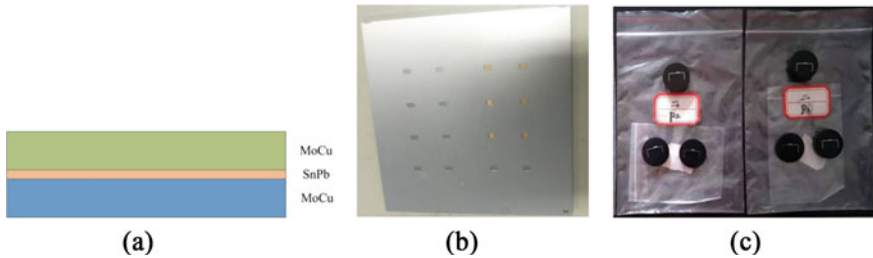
a Welding sample profile, b Welding fixture, c Sample profile after polishing
